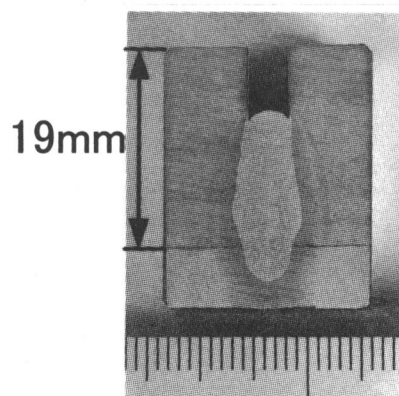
17 Cross-section of welded joint in DC welding without pulse. ( $I=500A, v=7.5mm/s$ )
